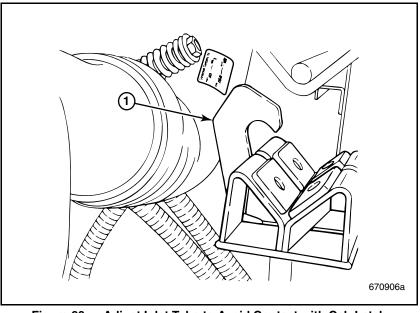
Adjust Inlet Tube to Avoid Contact with Cab Latch
